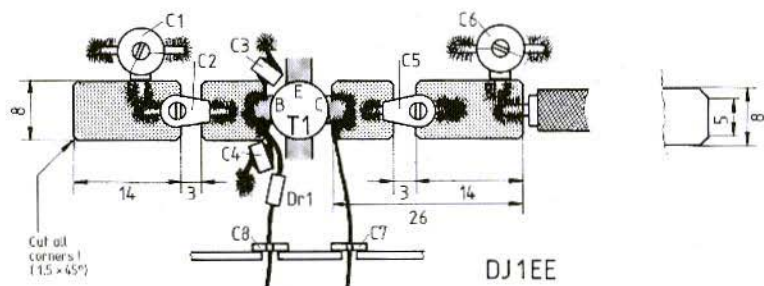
Dimensions and construction of the stripline circuits comprising double-coated PTFE PC-board material
